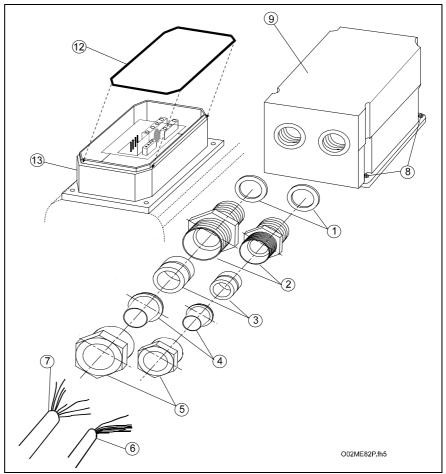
Drawing of EExd screwed joint with terminal box
